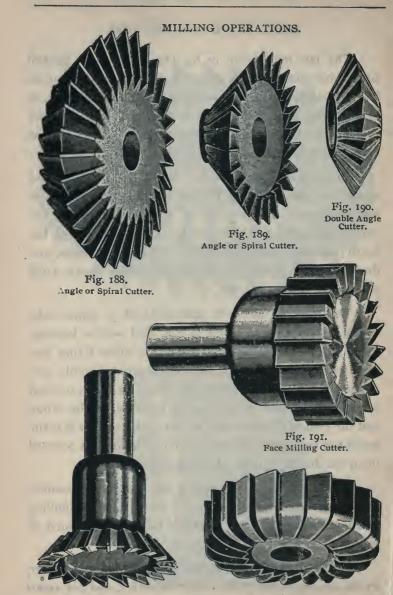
Angle or Spiral Cutter. Fig. 193. Face Milling Cutter.
